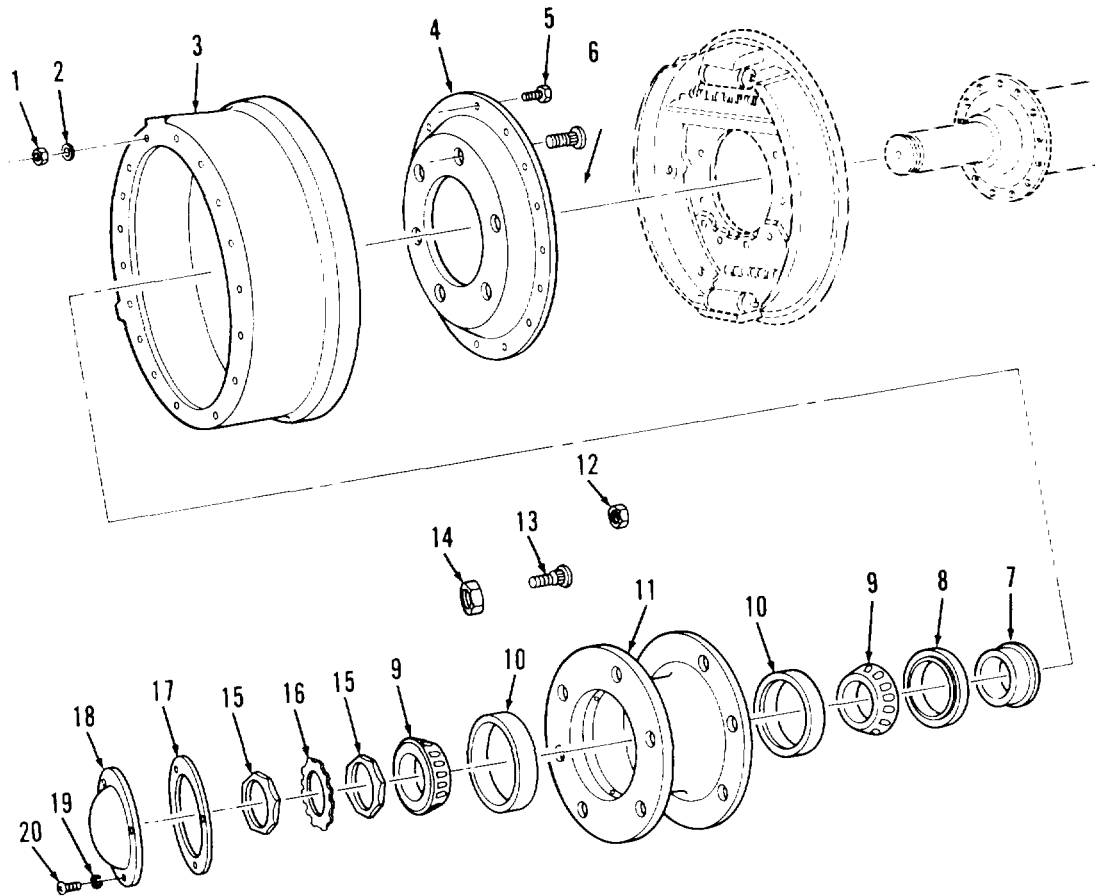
HUB ASSEMBLY, BRAKEDRUM, AND RELATED PARTS (M390C)
